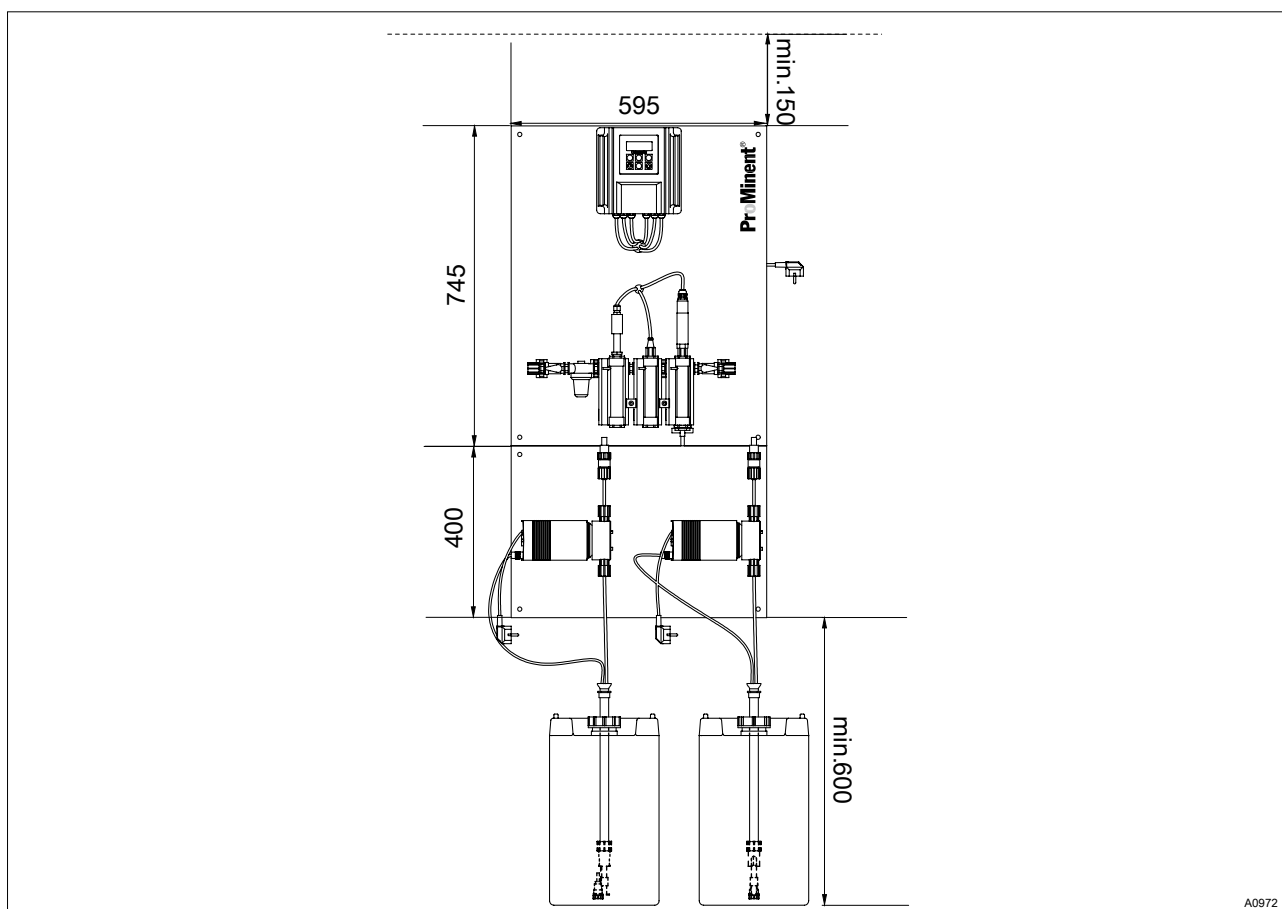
Dimensions sheet. All dimensions in mm. Depth 150 mm
